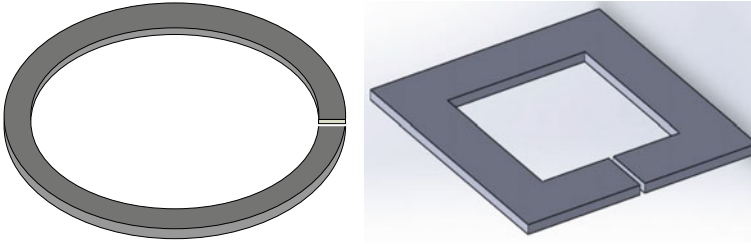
Ring type and frame type electrical steel sheets with one joint
